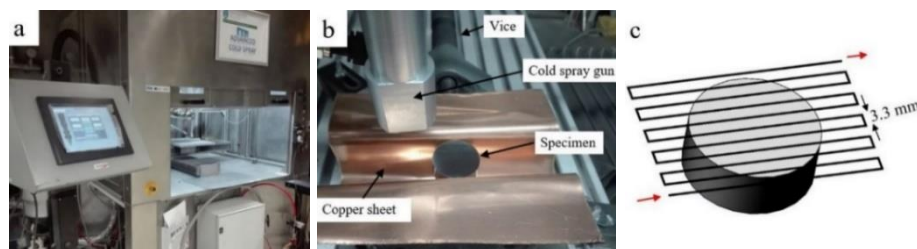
(a) The used Cold Spray system, (b) positioning of the billets before the cold spray process, (c) the selected zig-zag strategy.
